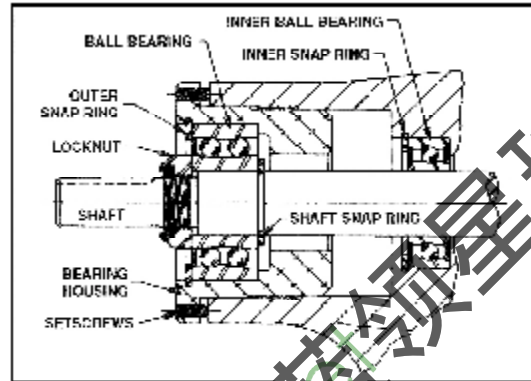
Thrust-Bearing assembly (GG, HJ, HL)
